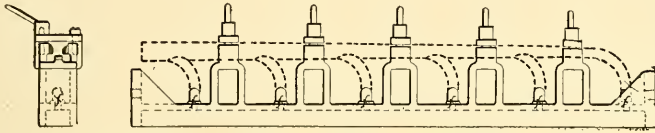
Details of Fixture Proper. Assembled Manifold Indicated by Dotted Lines.
